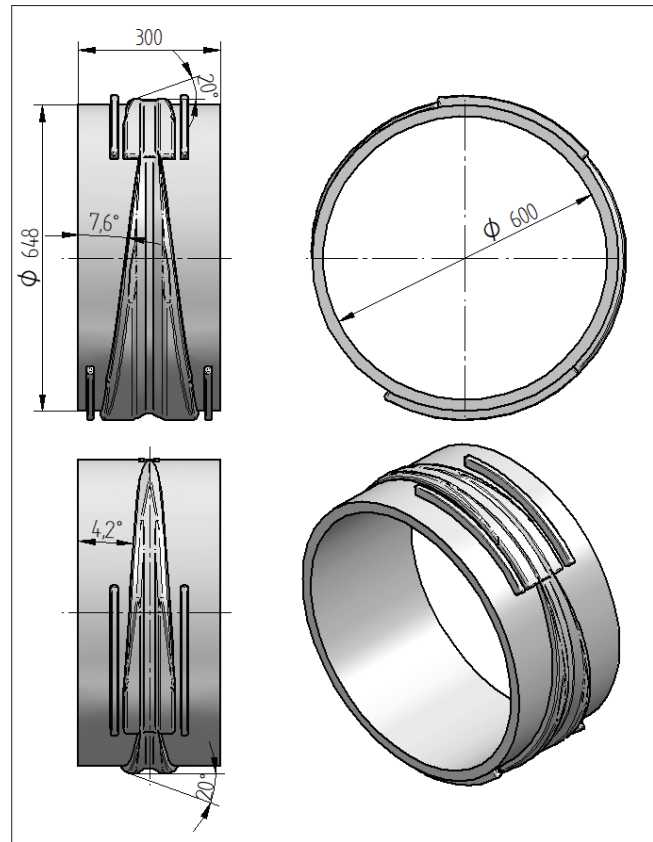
Wedge tool segment used to roll a bracket preform in a dual system
